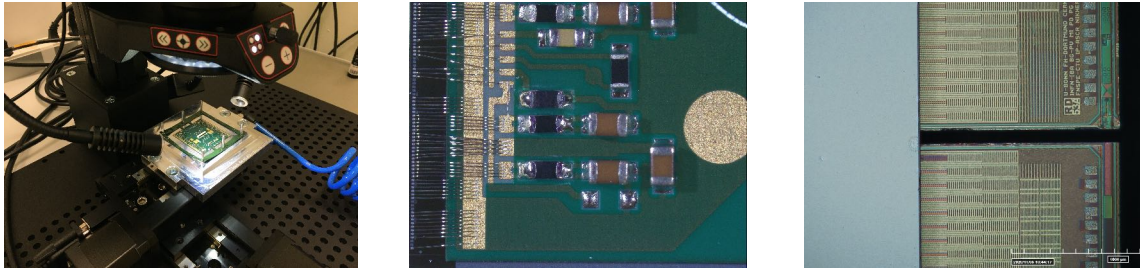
Automated visual inspection setup (left), close-up image of wire-bonded assembly (centre) and bare module showing neighbouring front-ends (right).
